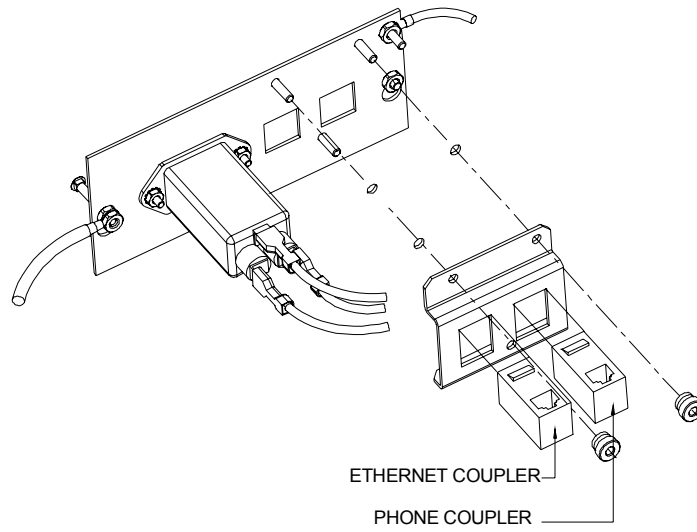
MAXX UPRIGHT - POWER ENTRY ASSEMBLY
